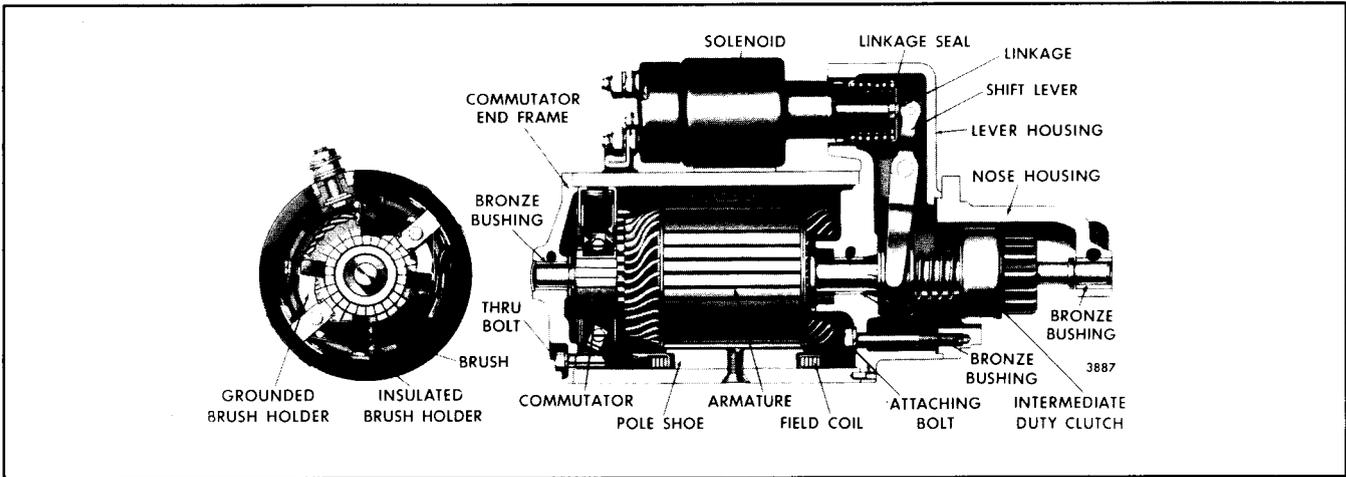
Cross-Section of Motor with Intermediate-Duty Clutch
